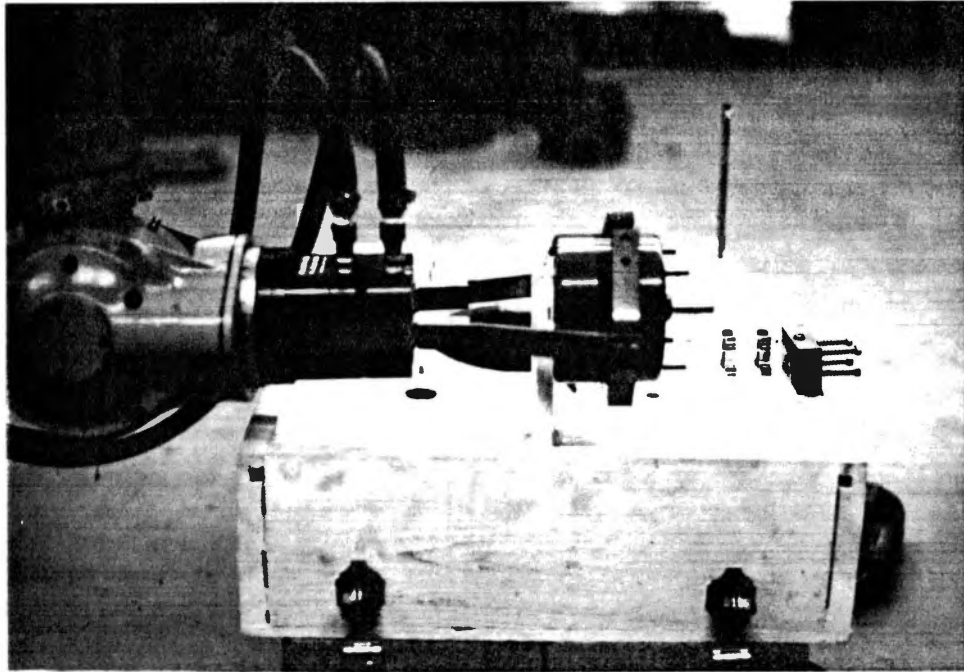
Robot Positioning Motor Against Bolt Containment Plate
